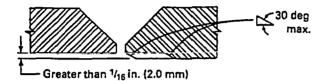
BUTT WELDING OF PIPING COMPONENTS WITH INTERNAL MISALIGNMENT
